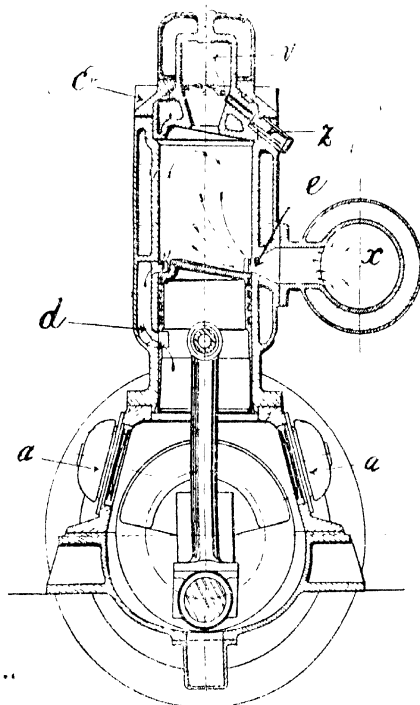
Sectional elevation of Atlas-Craig two stroke marine engine for heavy oils, showing vaporiser and cylinder cover cast in one piece.
